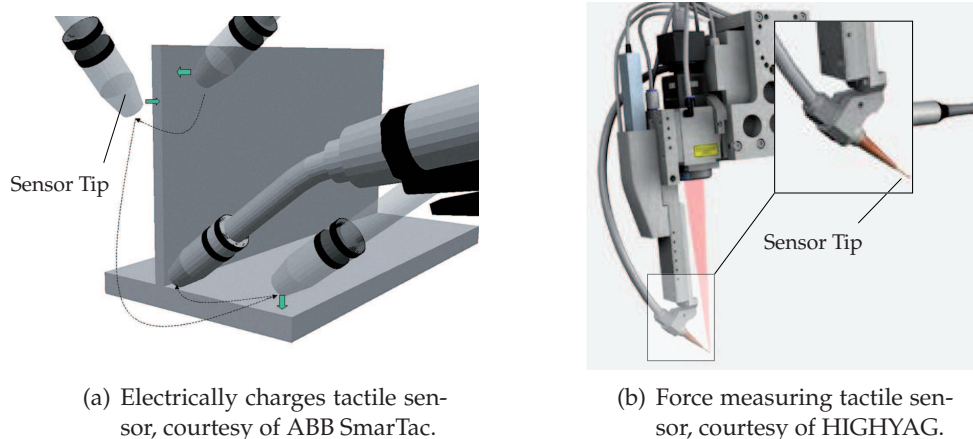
Tactile sensors already in use for robotic welding.
